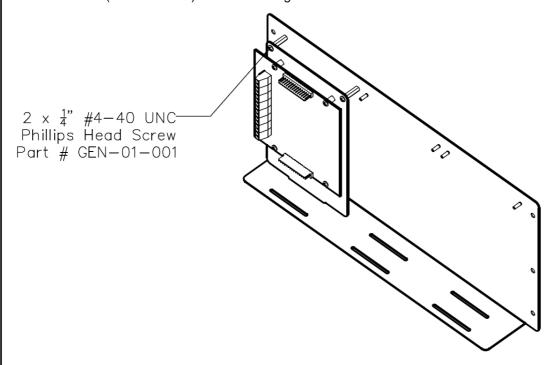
, IFS-804 Board Mounted to CHS-3L chassis
